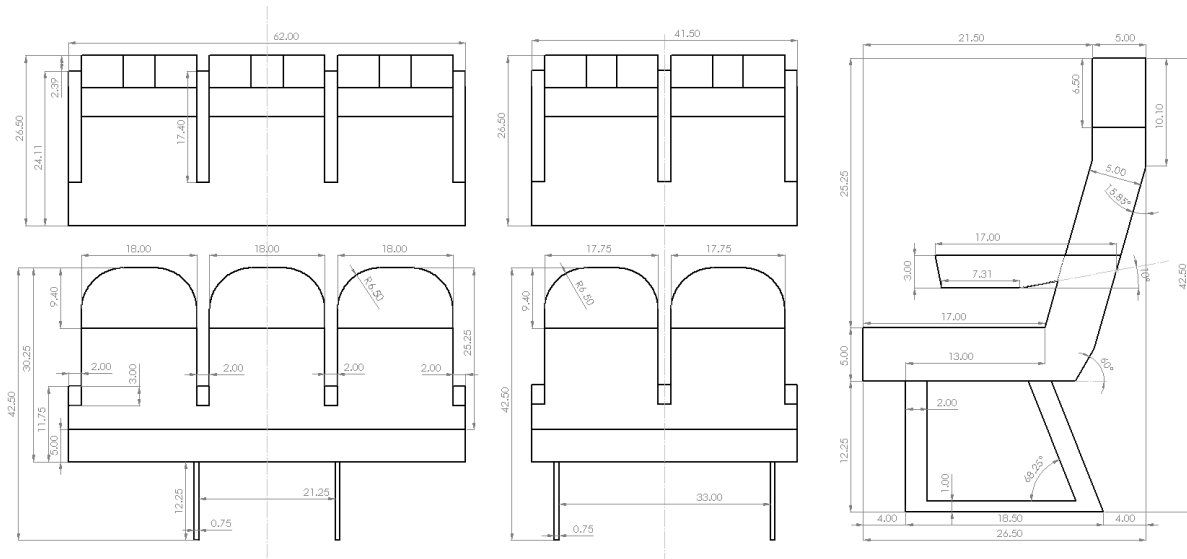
2D Drawings with dimensions of seats. Dimensions in inches.
